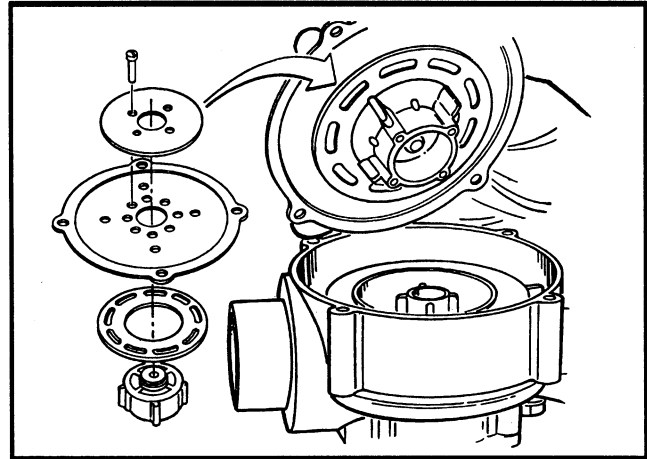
DIAPHRAGM AND FUEL VALVE ASSEMBLY
